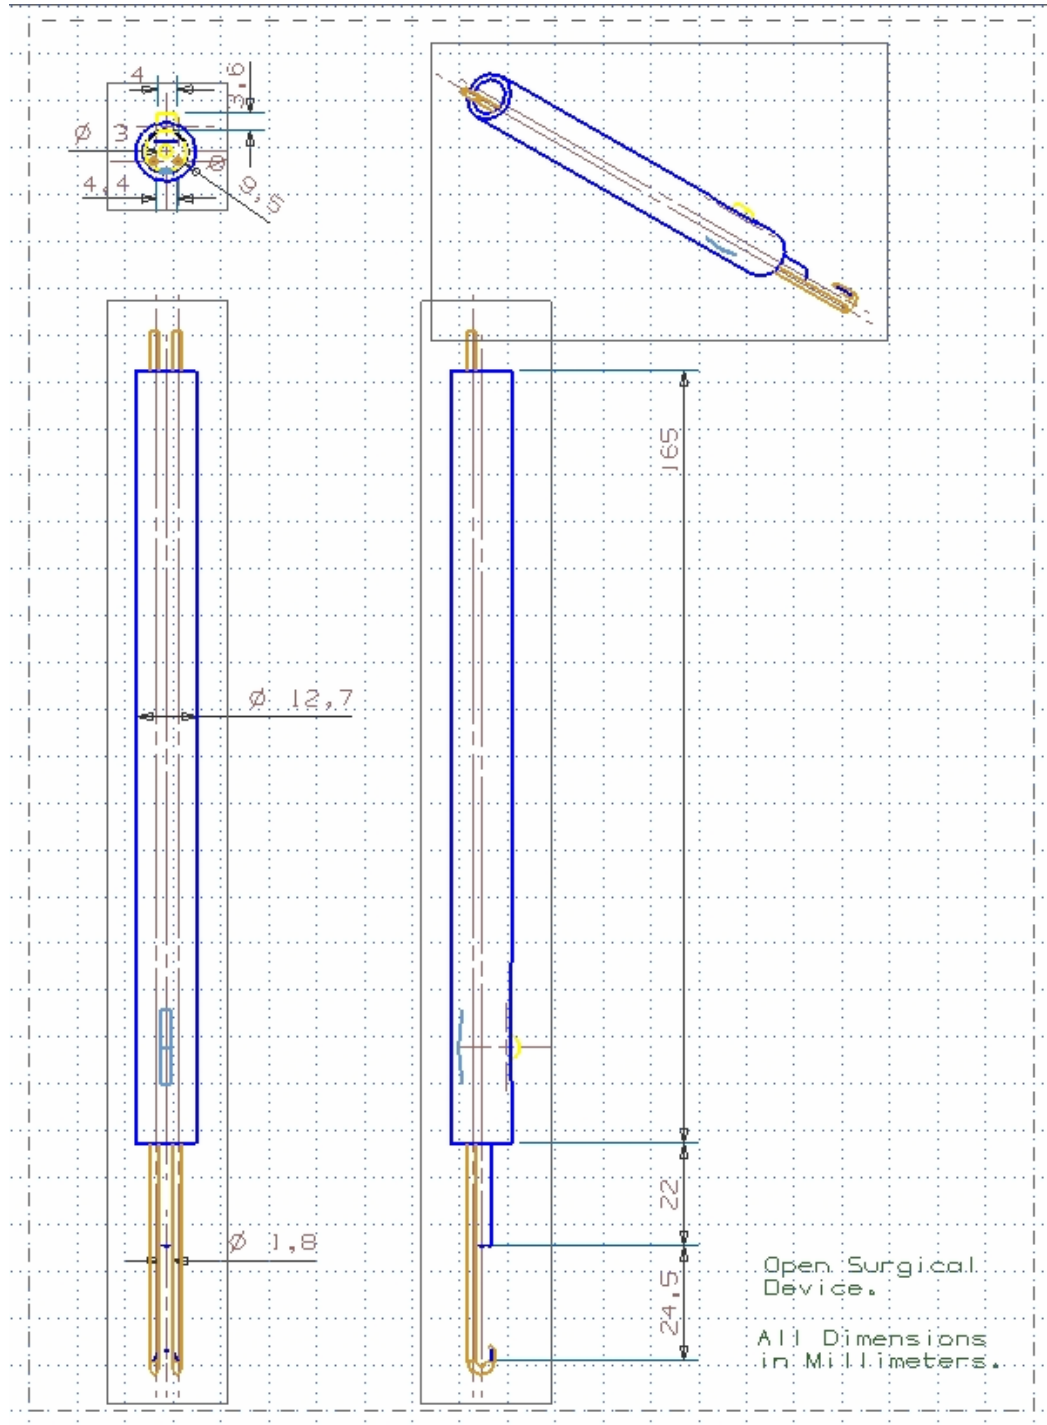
Open Surgery Monopolar Electrical Device Dimensioned Drawings
